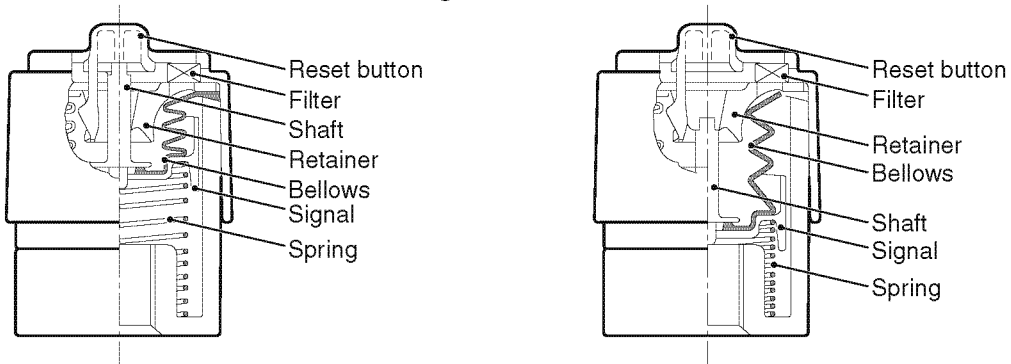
Mechanical dust indicator: Part code: 126650-12680
